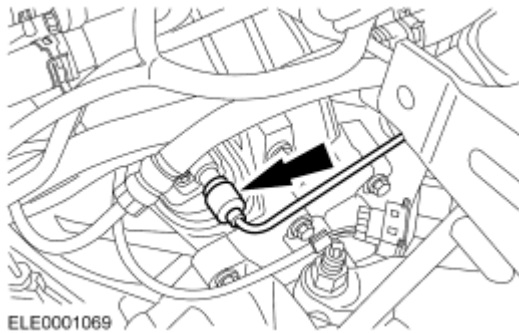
Locating Clutch Slave Cylinder Supply Tube
